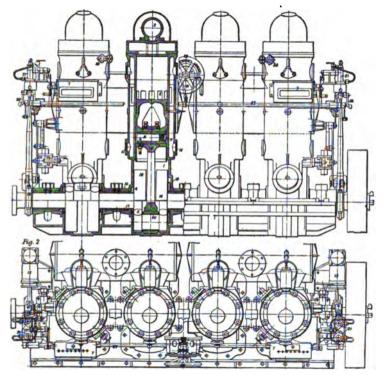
Beardmore 200 B.H.P. Oil Engine.
